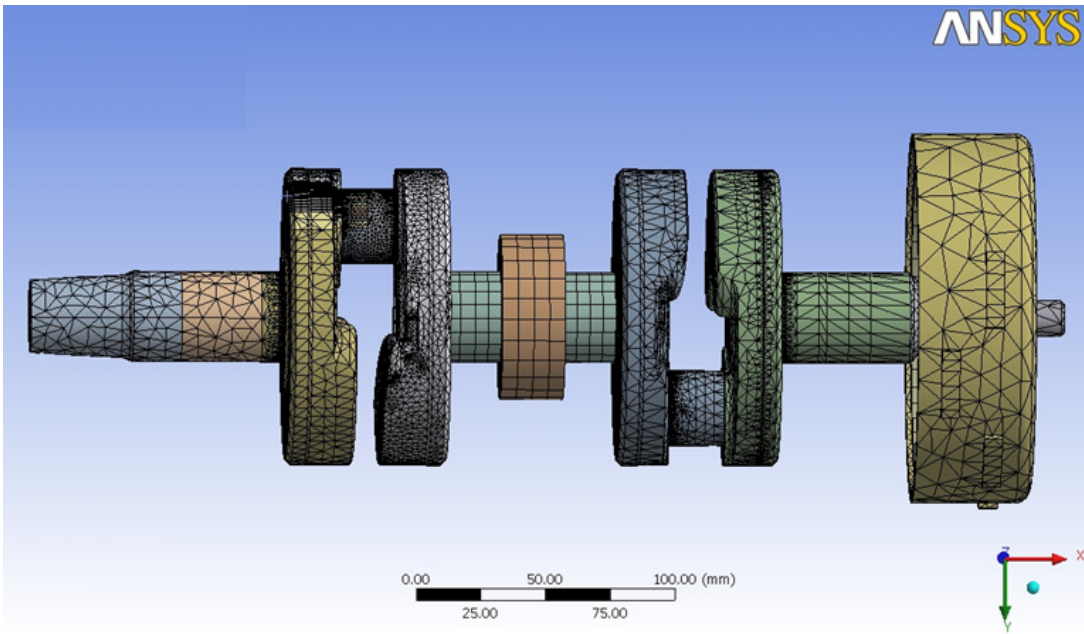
The FEM solid element mesh of the crankshaft assembly.
